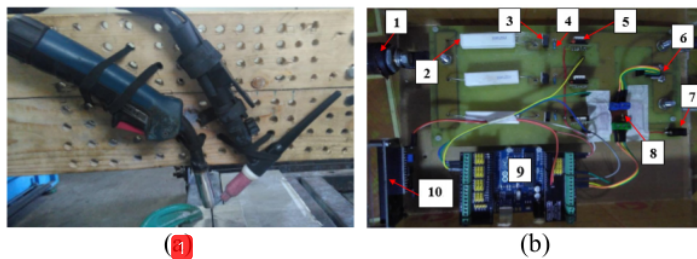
Double Electrode Gas Metal Arc Welding
